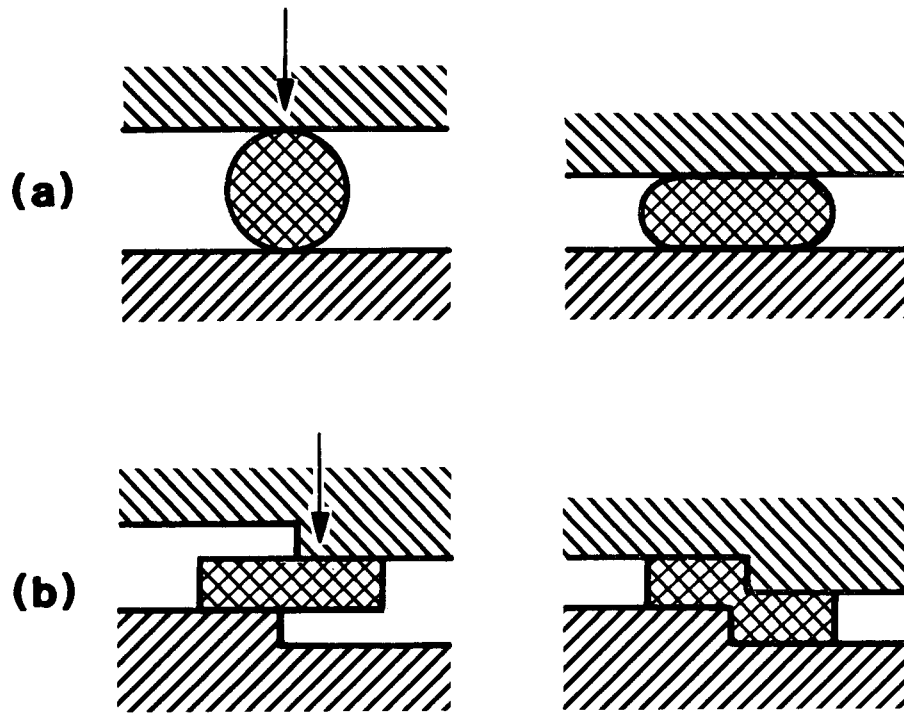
Example of (a) Compression Joint and (b) Shear Joint (Ref. 3.3-15)
